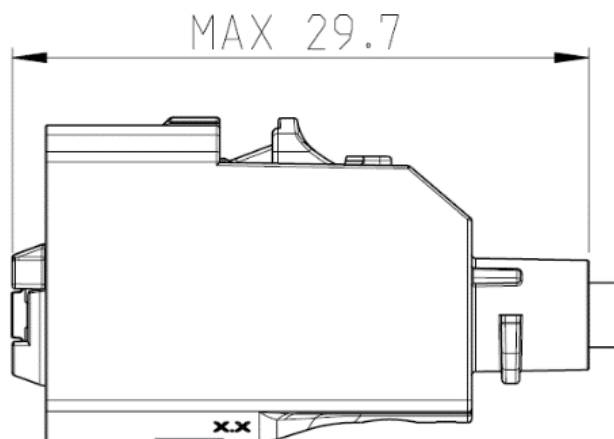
MAXIMUM DIMENSION WHEN TPA IS IN ENDLCK POSITION
